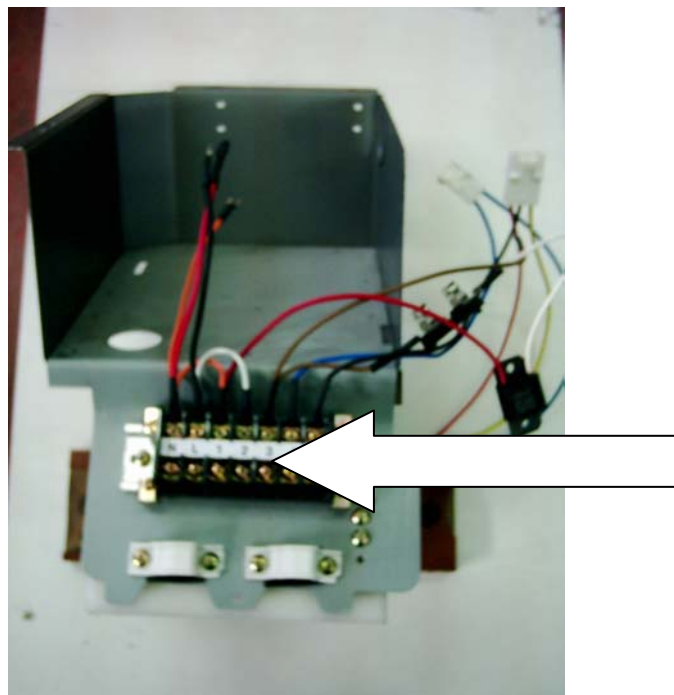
Assembling of the connector group and holders on to the metal sheet
